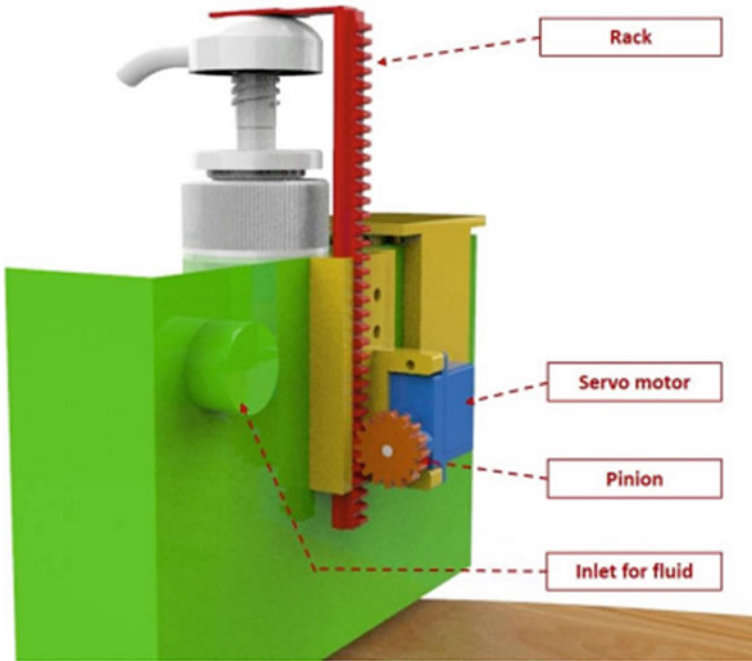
A backside isometric view of the dispenser showing rack and pinion mechanism
